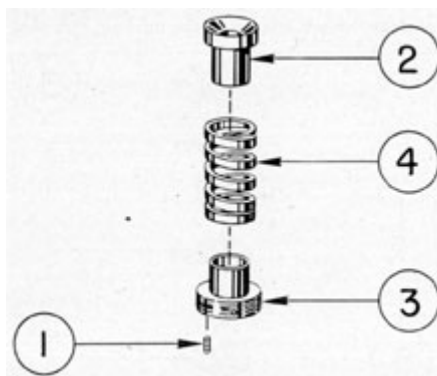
Stadimeter transmission shaft packing gland assembly (spring type).
